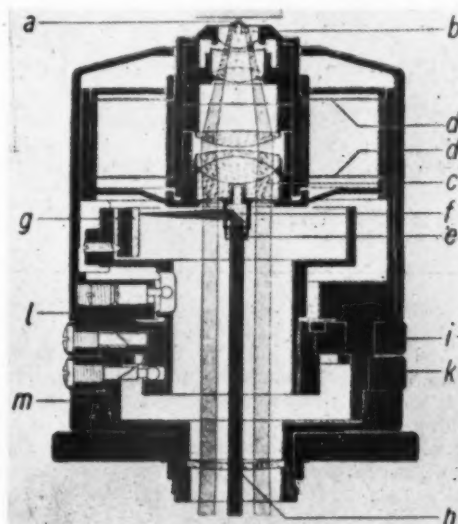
Zeiss micro-indenter and objective. (a) Diamond pyramid, (b) front lens, (c) back lens, (d) disc ring springs, (e) auxiliary objective, (f) mirror, (g) load scale, (h) correcting lens, (i) (k) knurled setting rings, (l) eccentric for sharp focusing, (m) unit of zero-point focusing.
